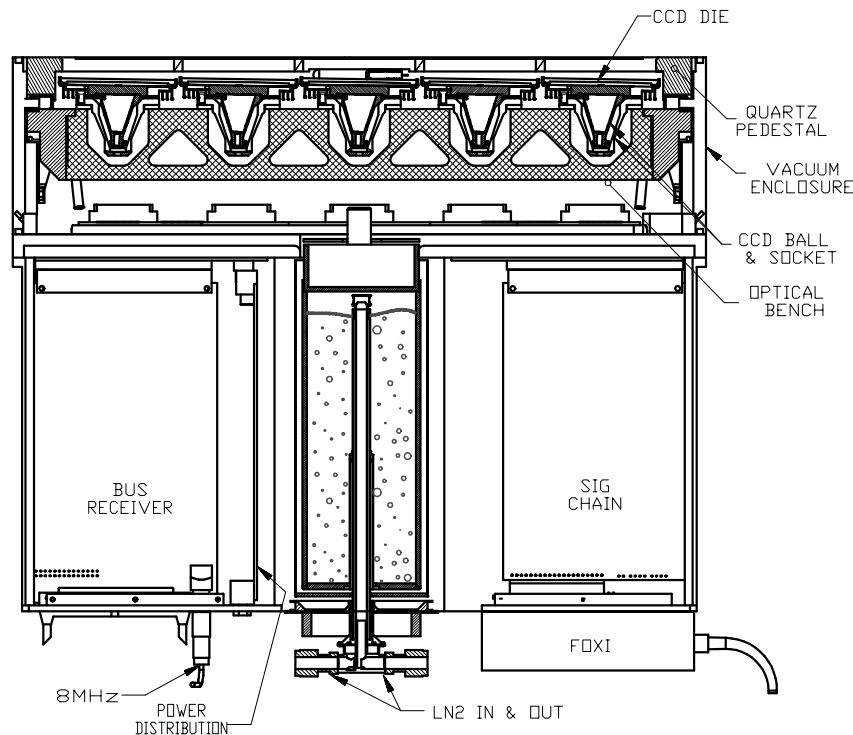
Cutaway drawing of a photometric dewar, showing the layout of the CCDs and kinematic mounts, and that of the circuit boards, FOXI transmitter, and LN2 container.
